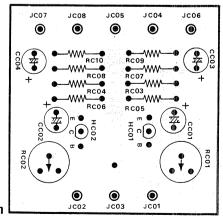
Dolby Level Board — PC01 Component Assembly Diagram
